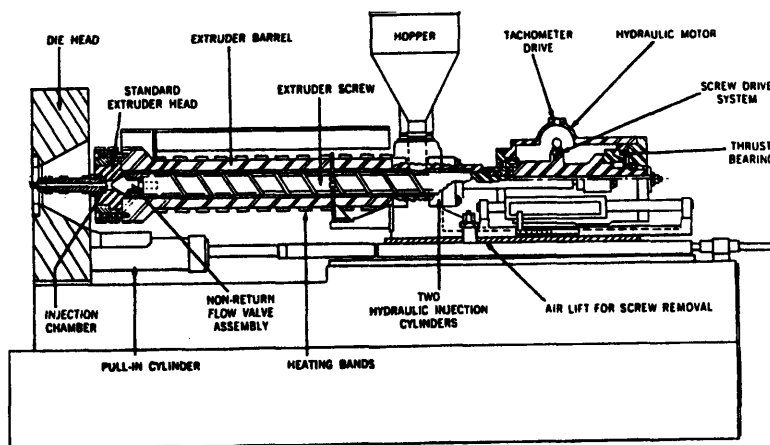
Schematic of the injection end of a reciprocating screw machine.
